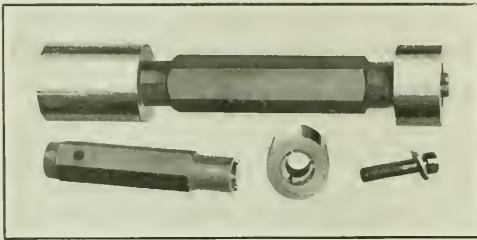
Assembled and Disassembled Plain Plug Gage made by the Pratt & Whitney Co.
